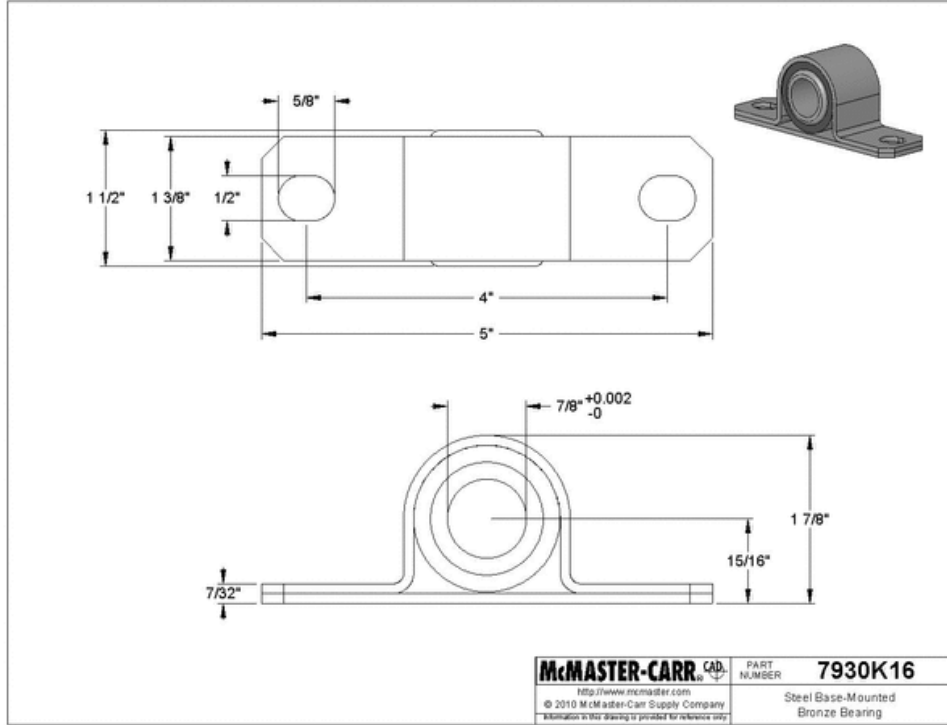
McMASTER-CARR Bearing #7930K16 (14)
